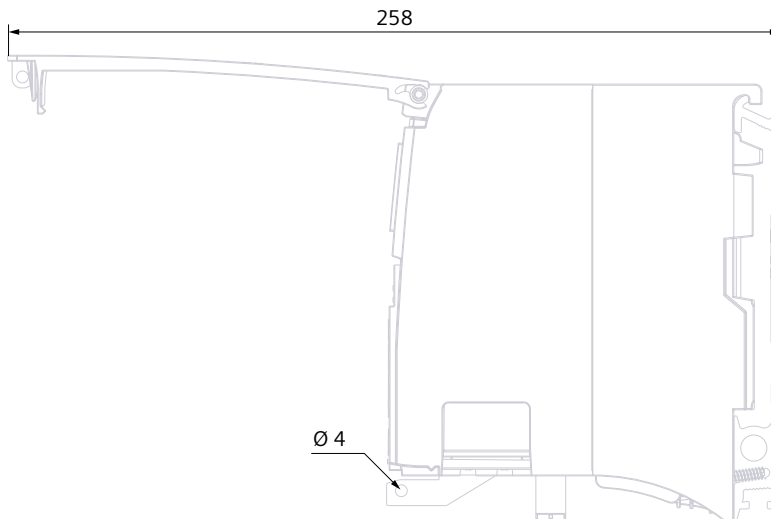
Dimension drawing of the CPU 1513R-1 PN, side view with front flap open
